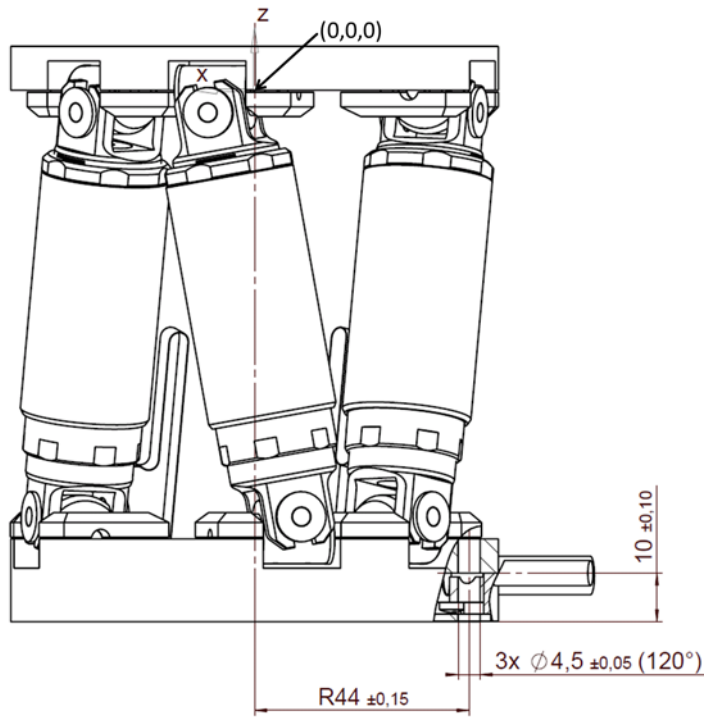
H-810.00 miniature Hexapod, side view (dimensions in mm)
